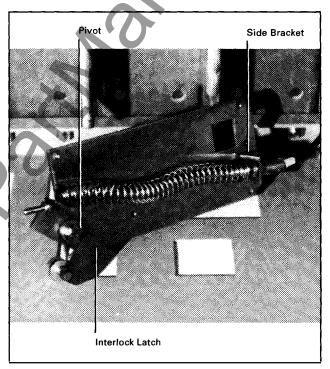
Side Bracket and Latch Mounted on Extension Plate
